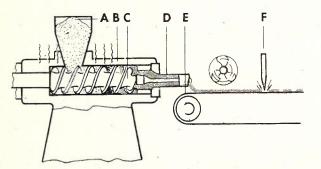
Schematic Diagram of Extrusion Moulding Machine.
